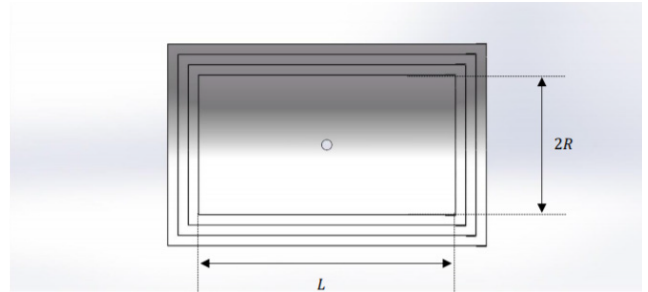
Sectional view of four-layer cylindrical magnetic shield barrel.
